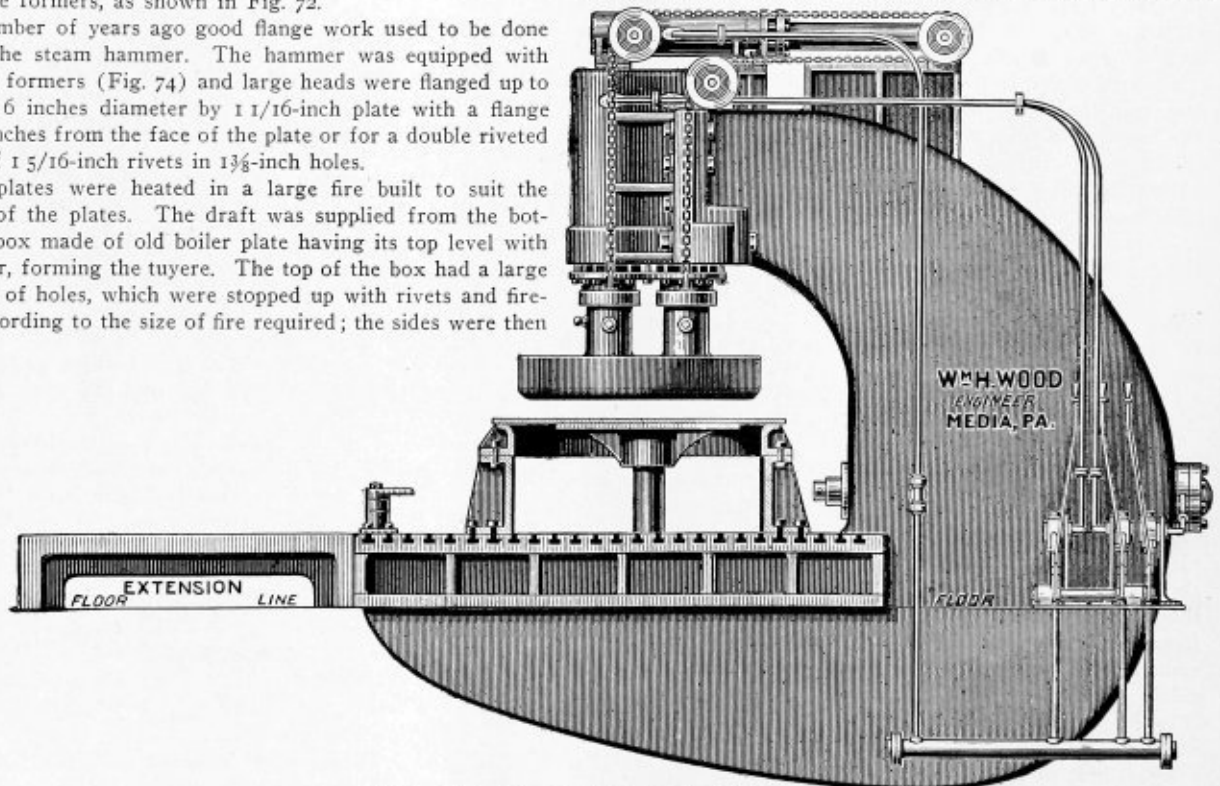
SECTIONAL OR UNIVERSAL FLANGE PRESS.
